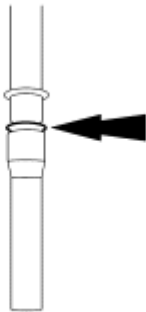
Locating O-Ring On Oil Level Indicator Tube
